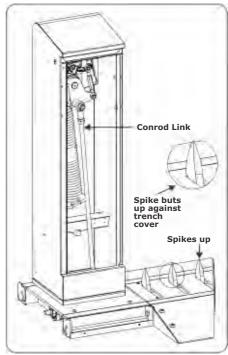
ADJUSTING THE SPIKES - DIRECT DRIVE
